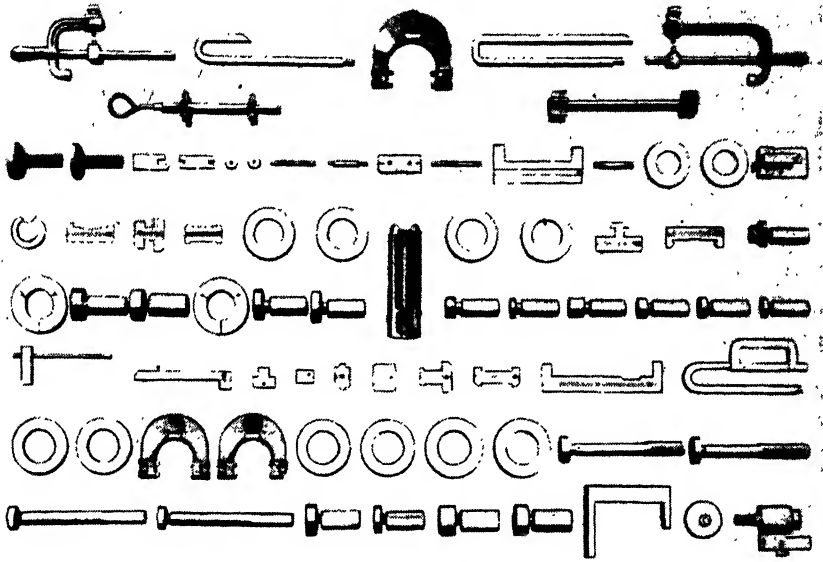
5. One set of gages used to check 75-mm. shrapnel bodies. This illustrates the variety of gages sometimes required for inspection of high-production precision items. (Courtesy of The Sheffield Corporation.)
